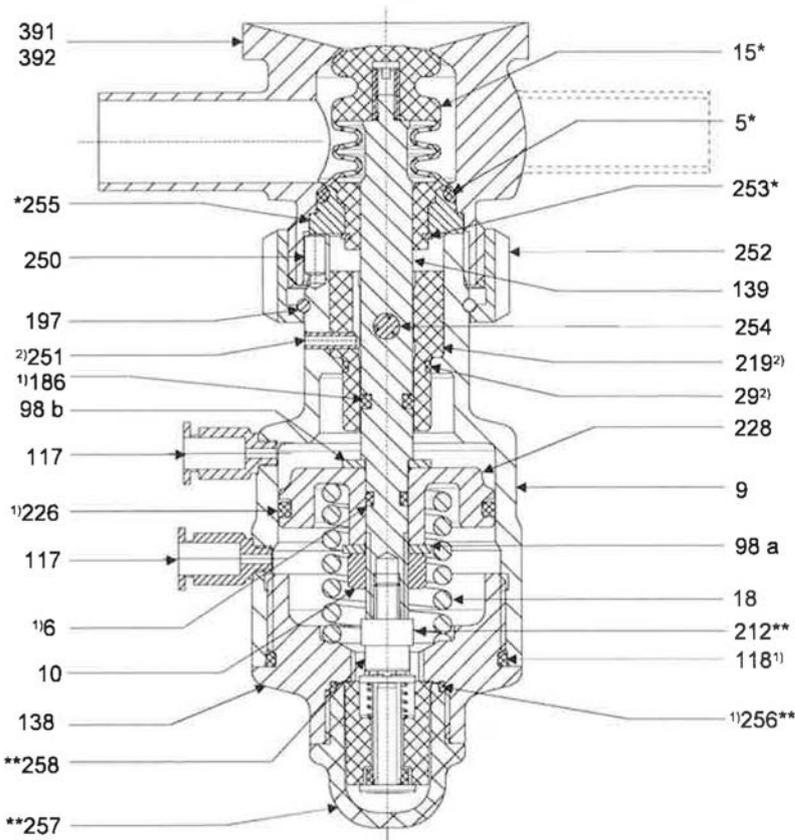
Pneumatic actuator H_A/M with housing HLA/T and HTA/T - metal model
